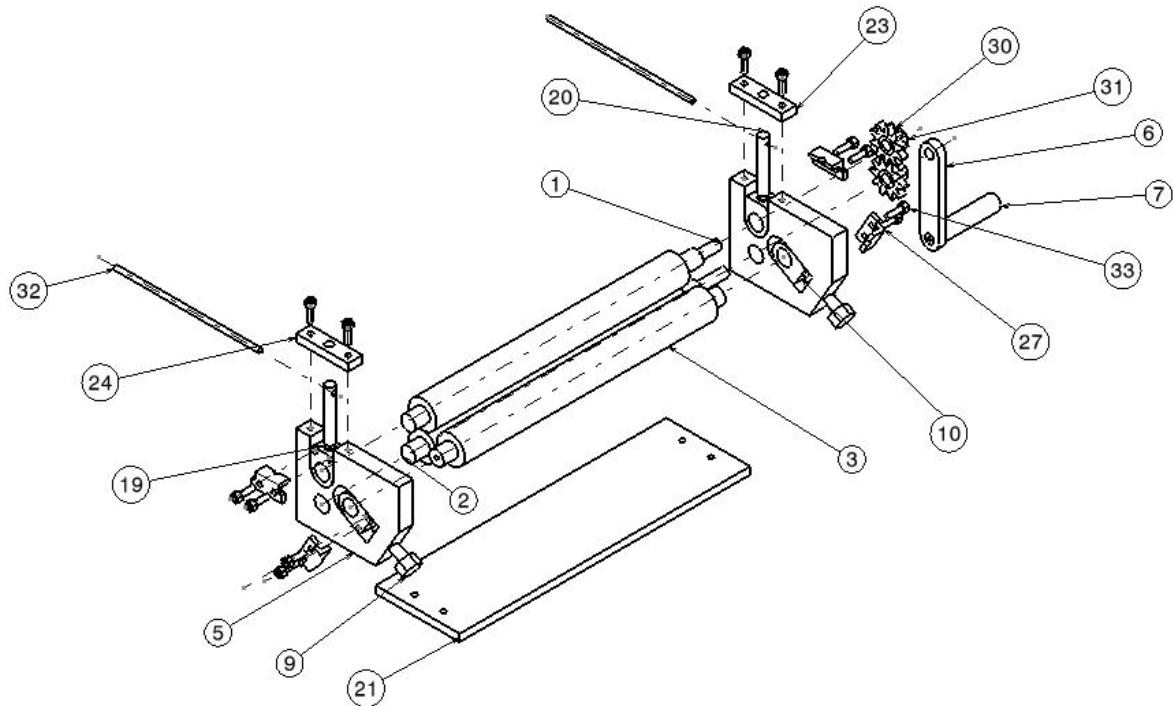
Exploded view of surface bending tool (details are mentioned in Annexure VI)
